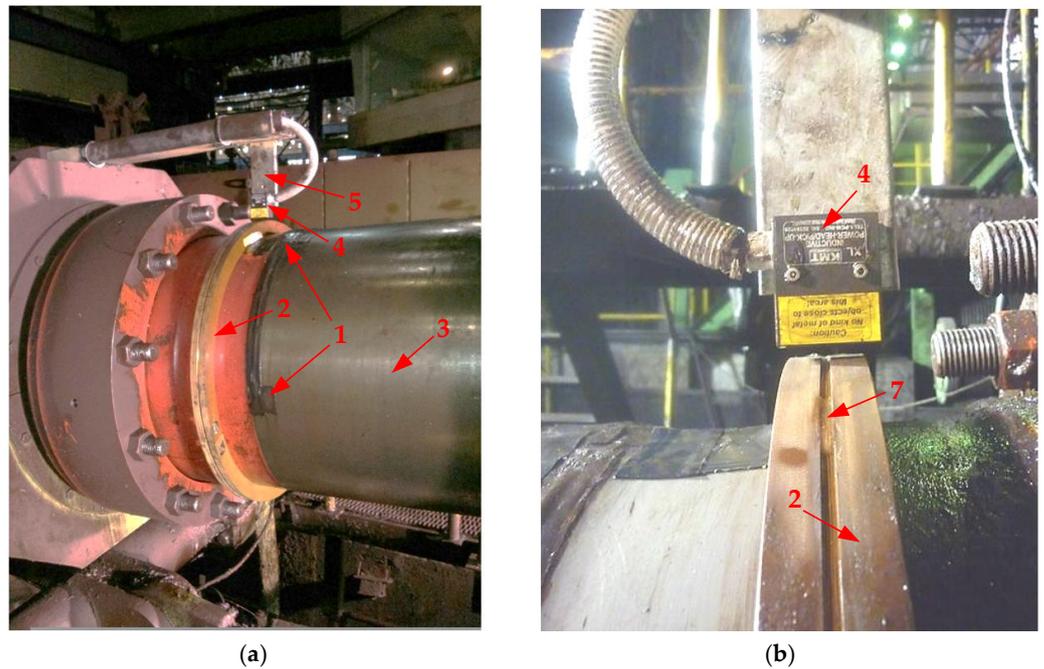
Location of the telemetric ring on the upper roll spindle (a) and mounting of the removable head on the lower spindle (b).
